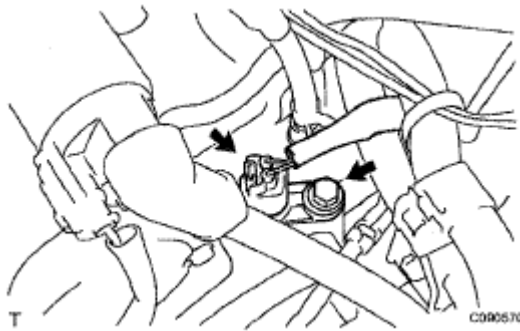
Locating Speed Sensor Bolt And Speed Sensor Connector (NC)
